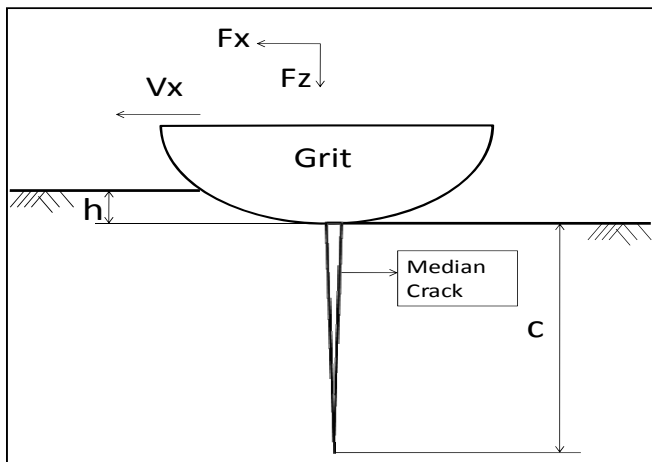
Wire saw roughness damage model showing ductile material removal and brittle fracture.
